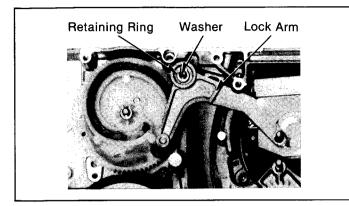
Assembly and Adjustment of Gears and Rod-(3)
